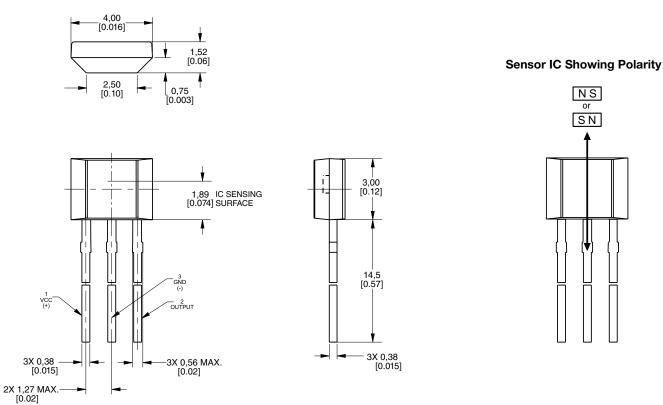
SM351RT, SM353RT Sensor IC, Tape and Reel Mounting Dimensions (For reference only. mm/[in].)
